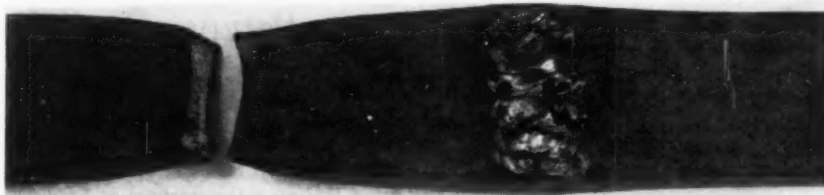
TENSILE SPECIMEN CONTAINING WELDED JOINT WITH ABUNDANT SURFACE POROSITY
